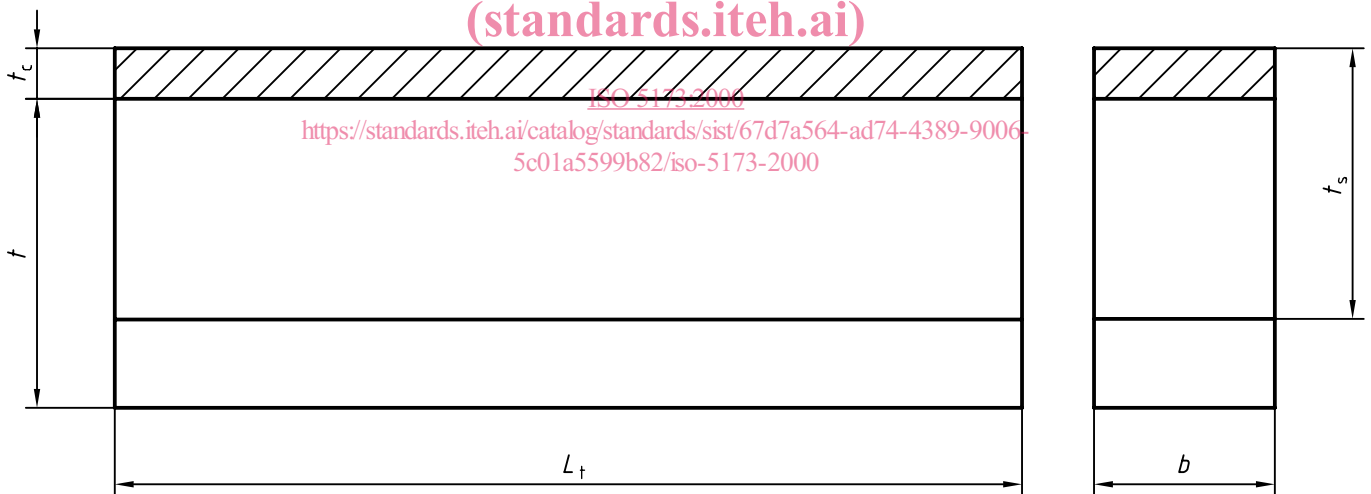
Face bend test specimen for cladding without a butt weld (FBC)
